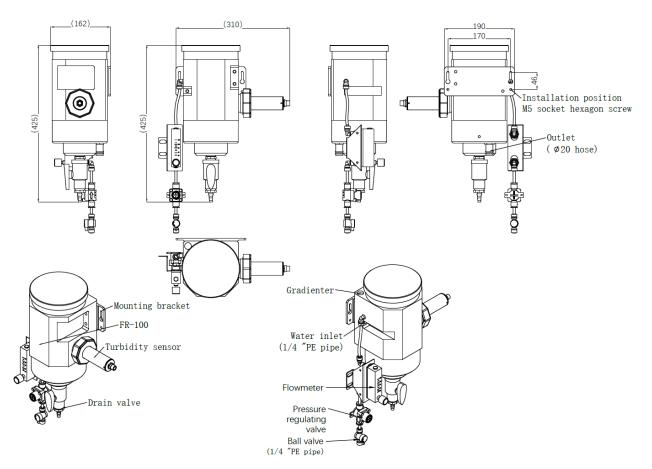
FR-100 Flow Reservoir Assembly Dimensions (mm) & Diagram
